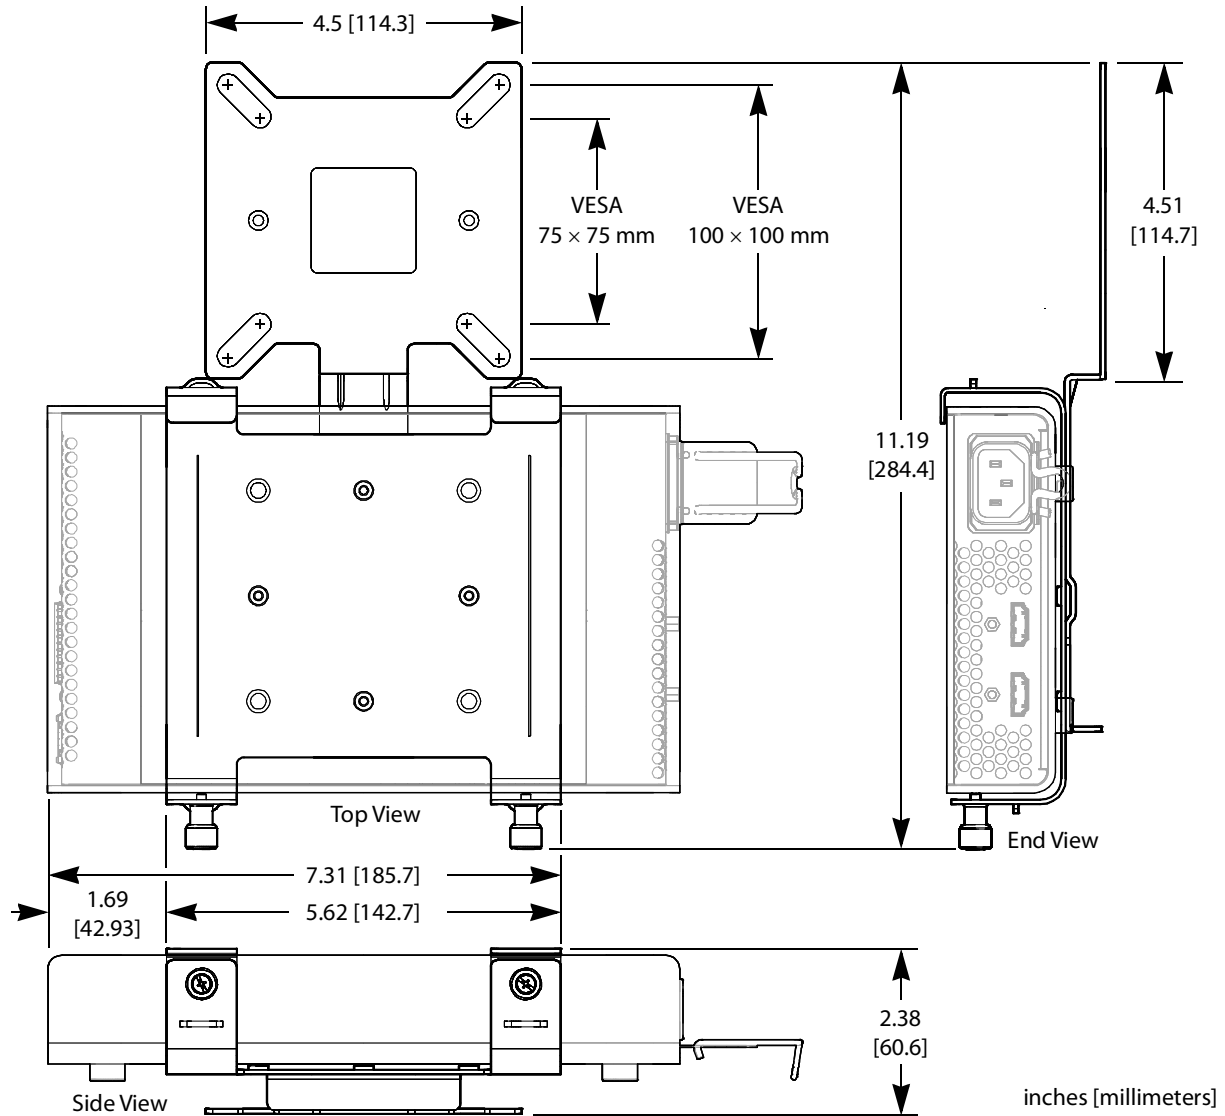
IPVU-MOUNTING-KIT dimensions for a VESA 75 mm or 100 mm stand-mounted monitor installation
